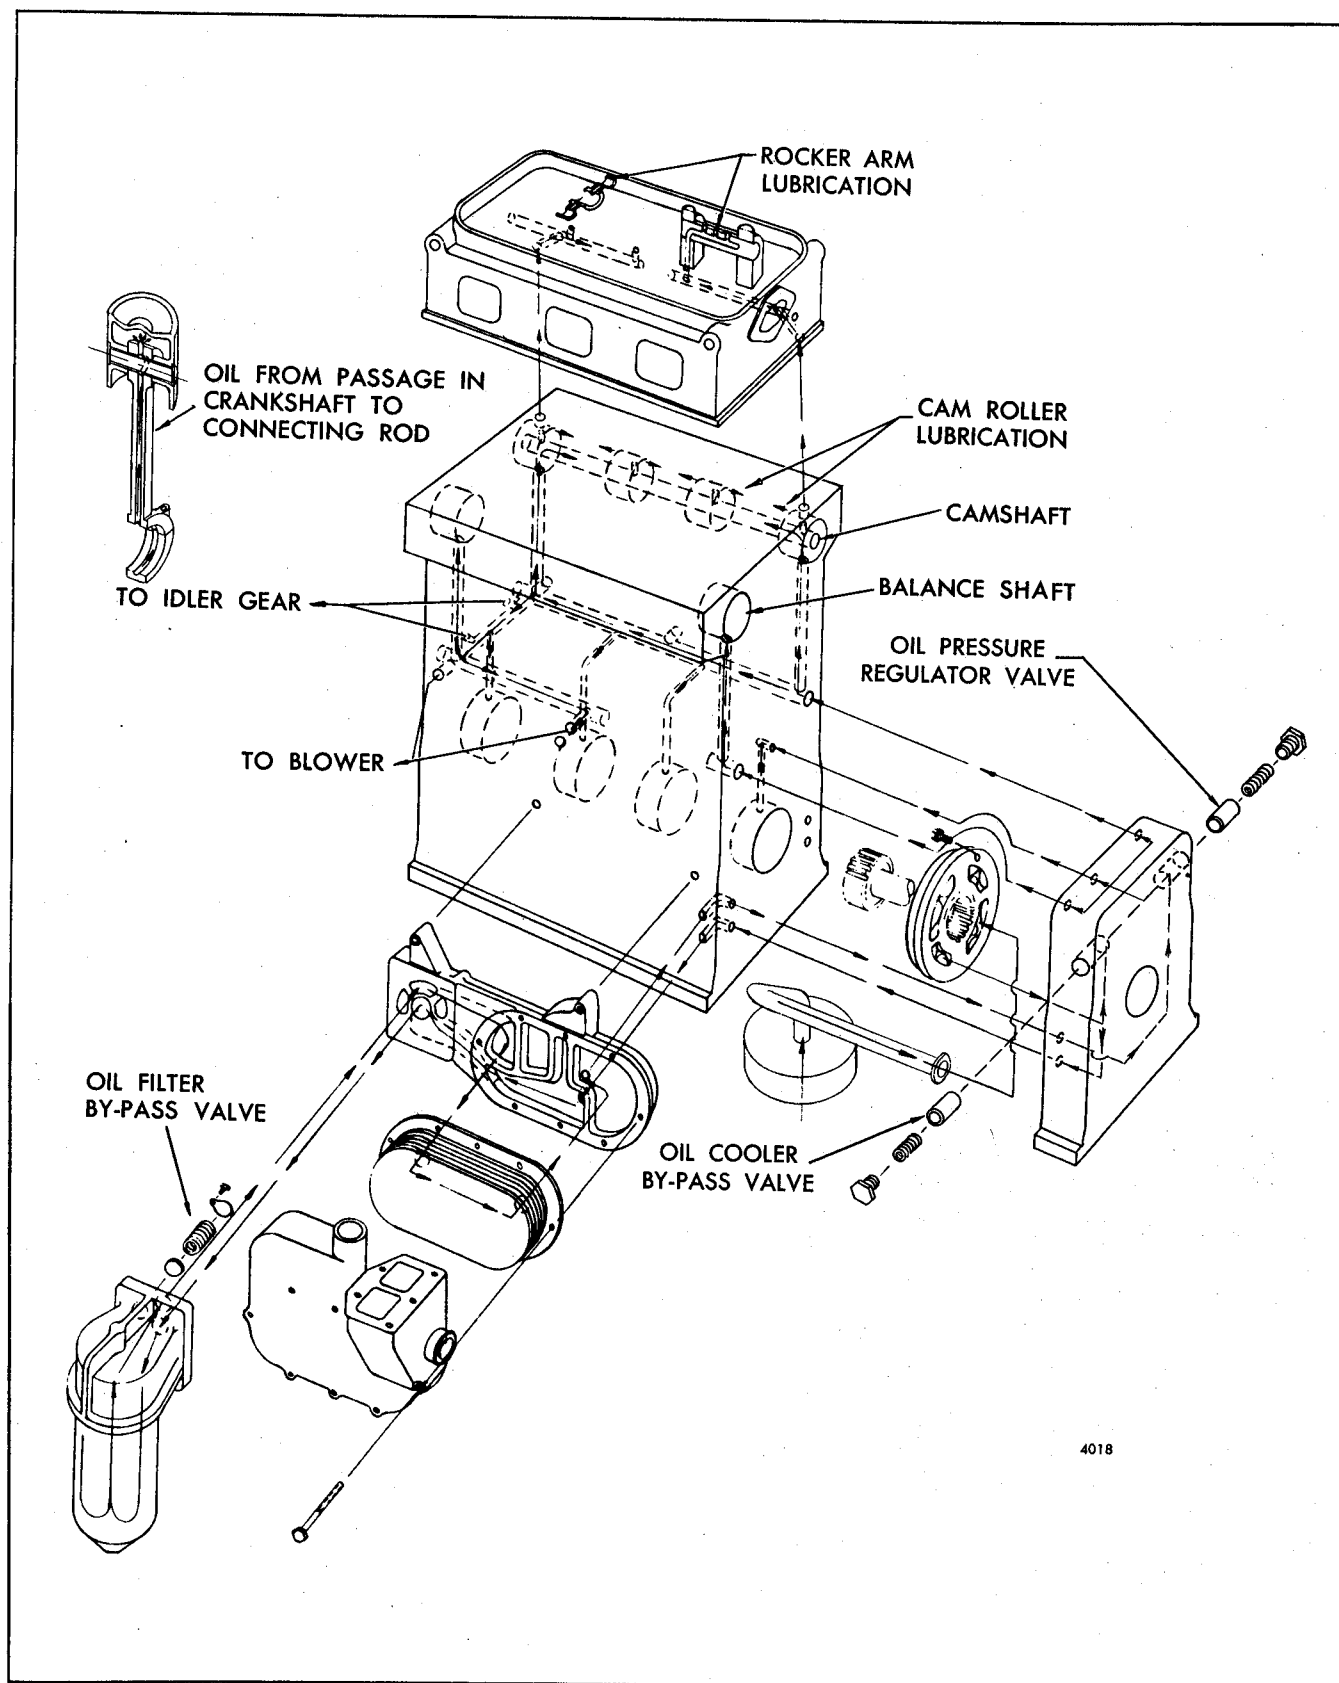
Schematic Diagram of Typical In-Line Engine Lubricating System
